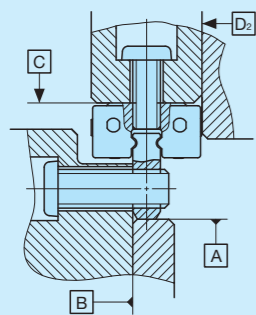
Reference mounting surface of LWL1...Y and typical mounting structure ①
